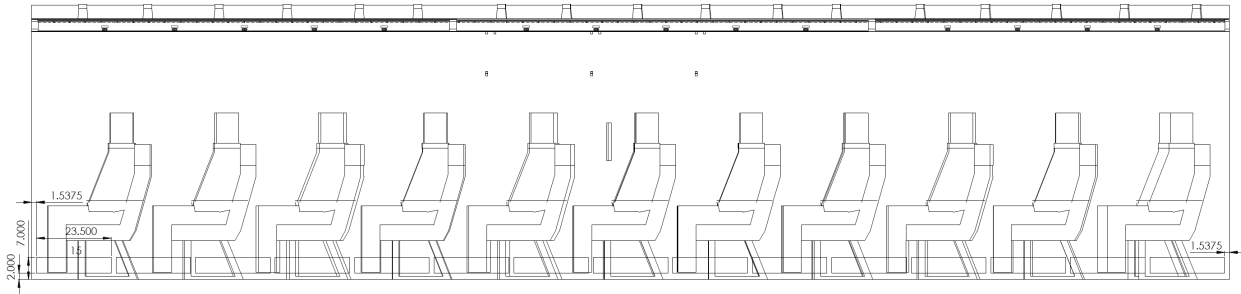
Cabin Mockup Outlets layout 2D drawing. Dimensions in inches.
